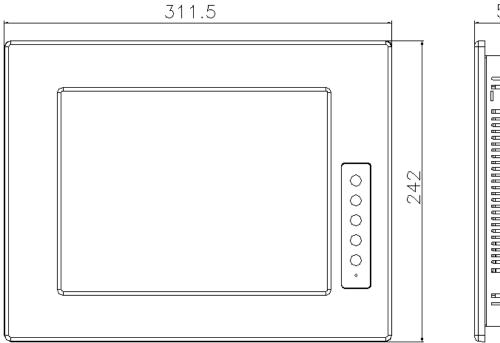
MPE 12 Physical Dimensions (millimeters)
